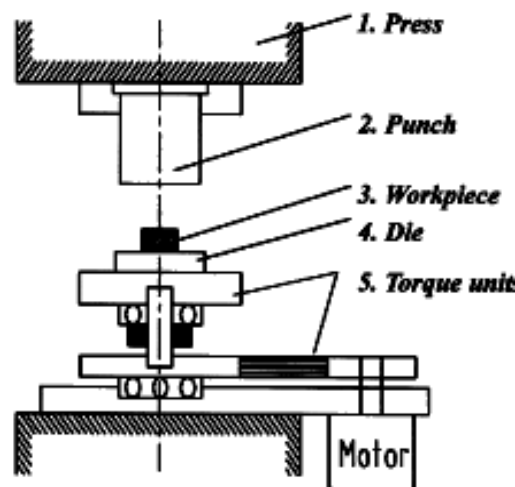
Schematic view of experimental equipment for rotation upset forging (J. H. Park et al., 2001) [46].
